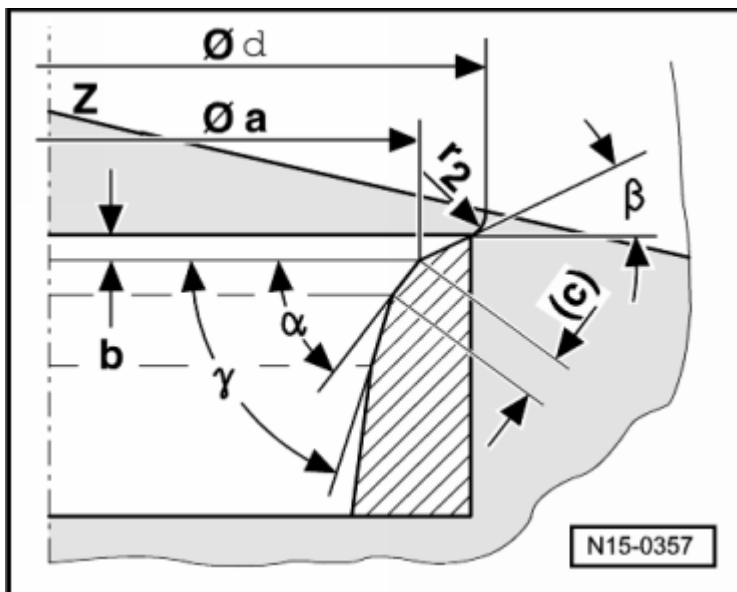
Identifying Angles And Dimensions To Rework Exhaust Valve Seat
